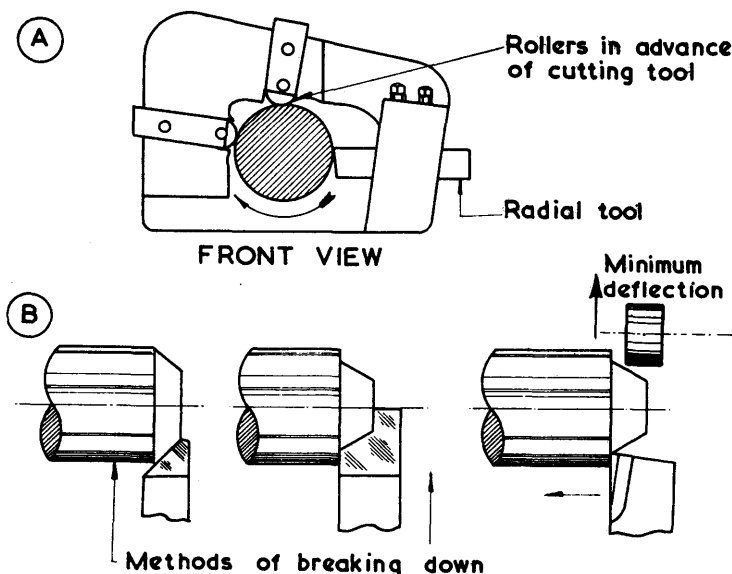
Roller-steady Ending Toolholder and Breaking-down Techniques.
